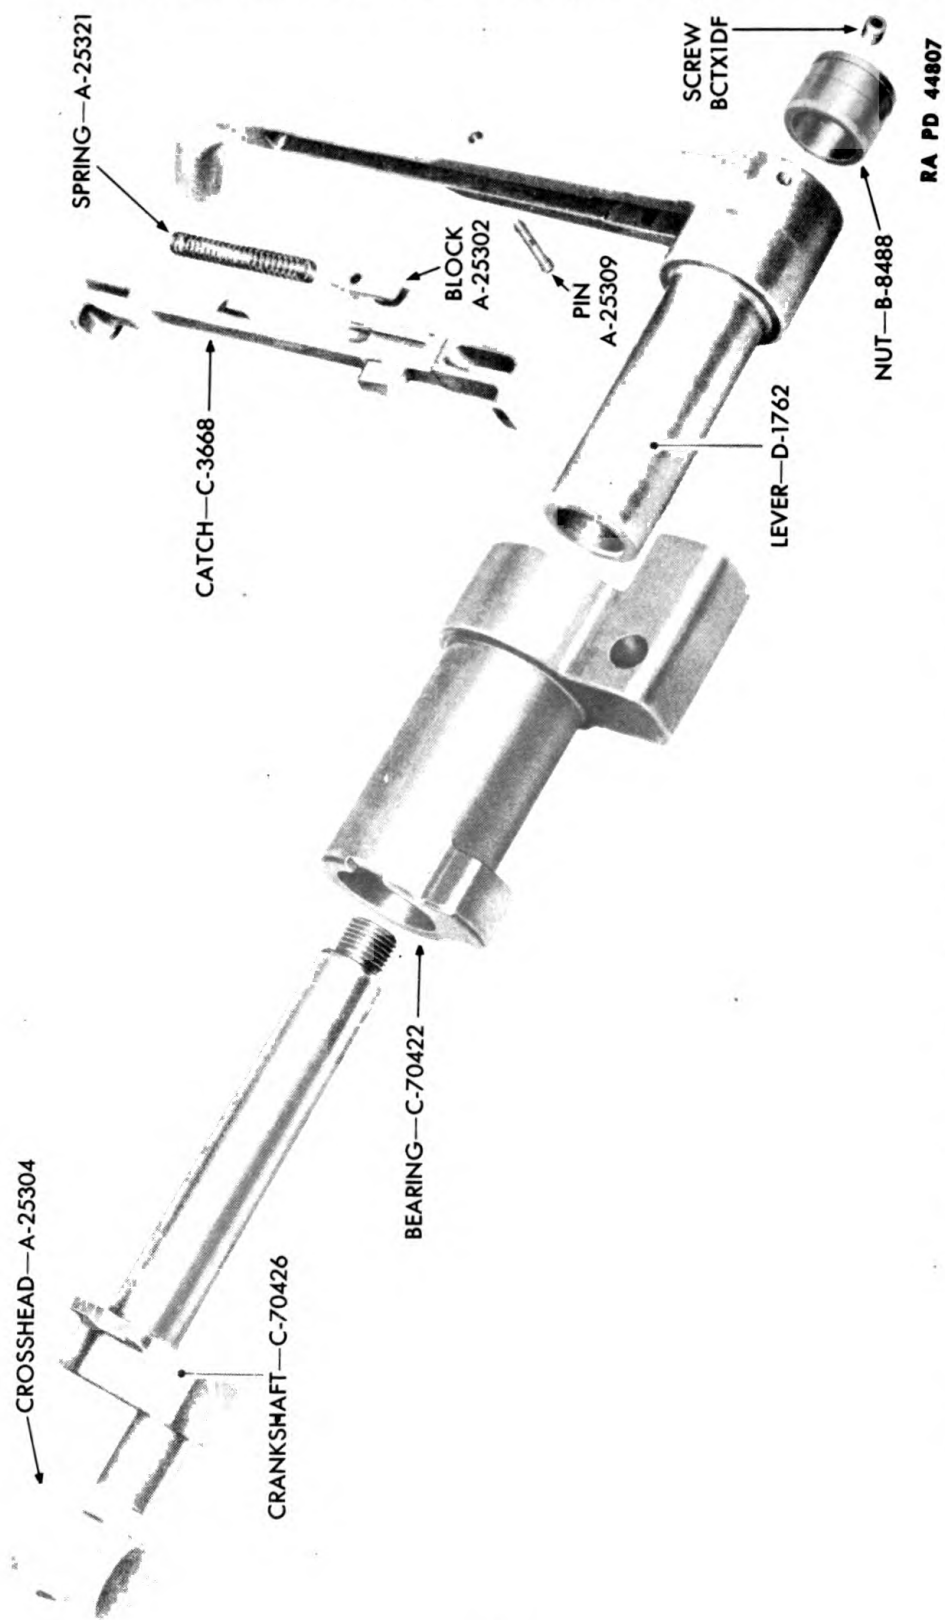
Breech Operating Lever, Bearing, and Crankshaft—Exploded View
